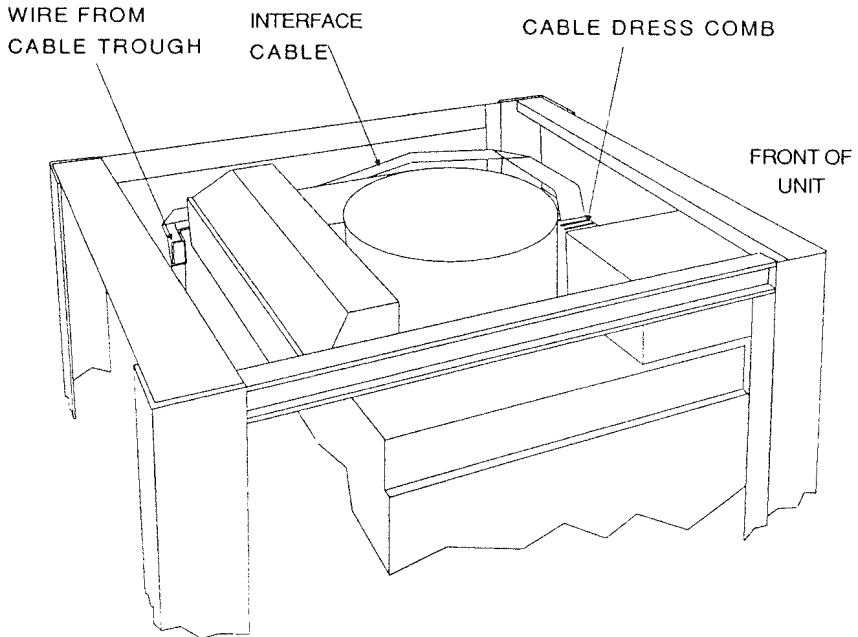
BOARD INTERFACE CABLE REMOVAL
